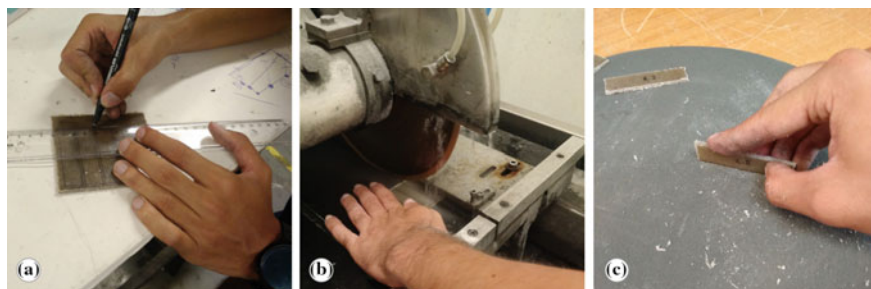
a Marking of the measurements of the test sample b Cutting and extraction of test specimens c Sanding test specimens
